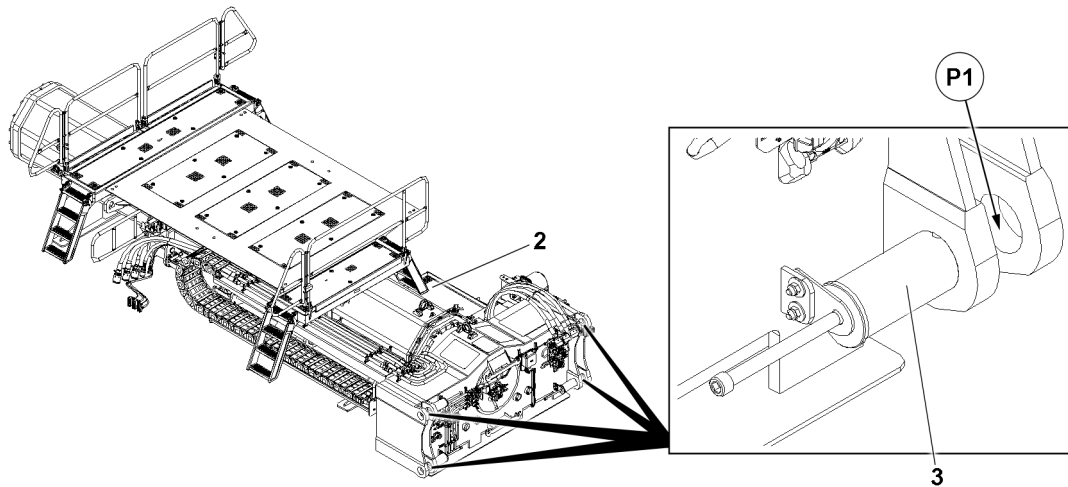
Assembling the adapter on the ballast trailer guide or intermediate section – Overview
